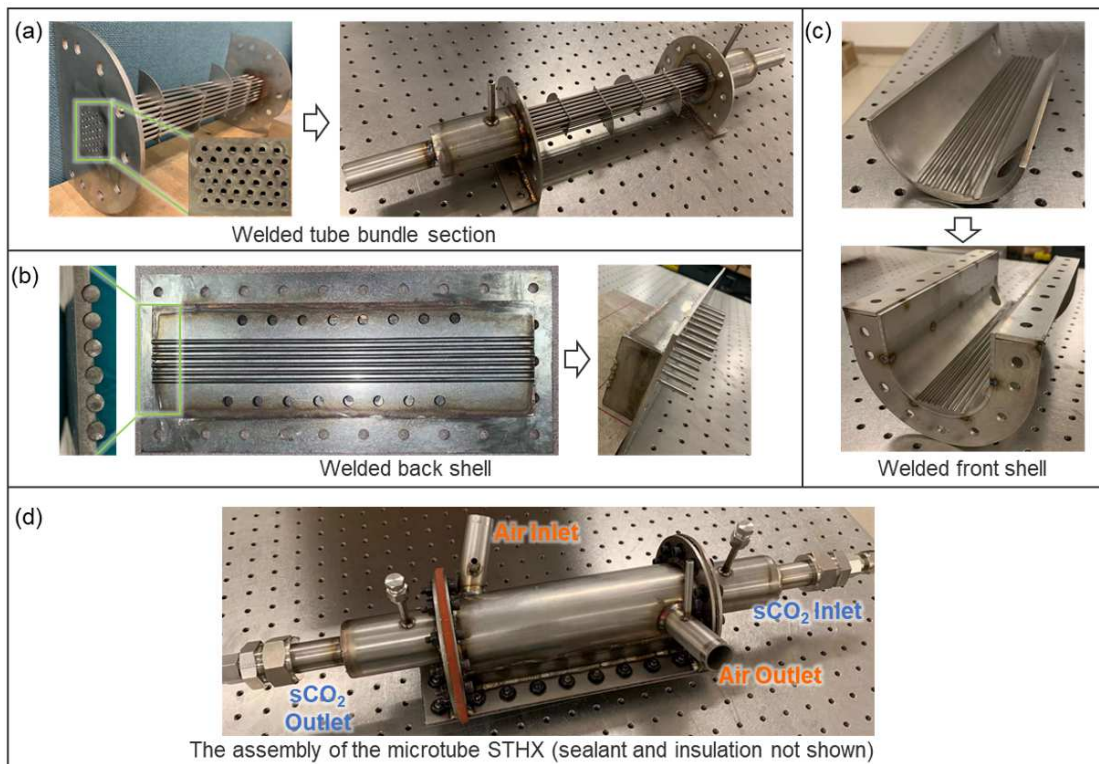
Process flowchart for fabricating (a) the tube bundle section, (b) the back shell, (c) the front shell, and (d) assembling the MT-STHX. (Reproduced with permission [51])
